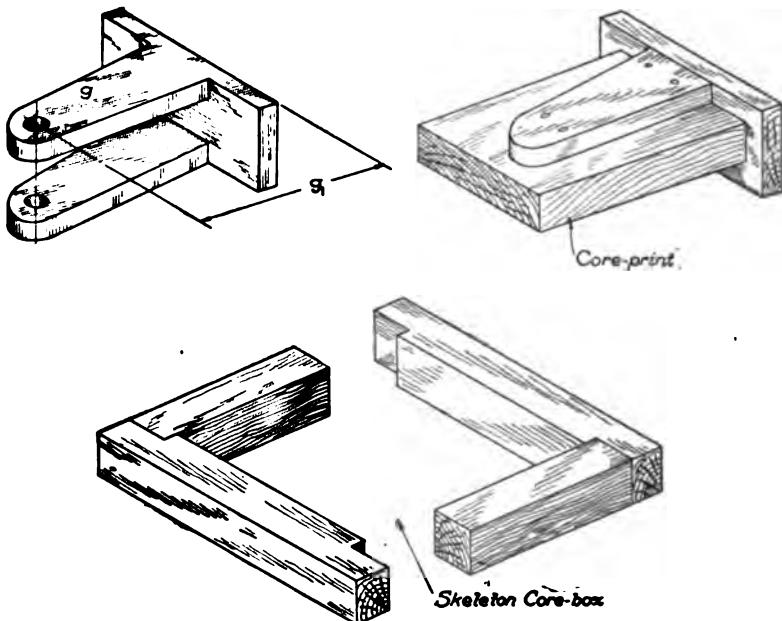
Casting Pattern and Core Box for Part *g*, Fig. 312
